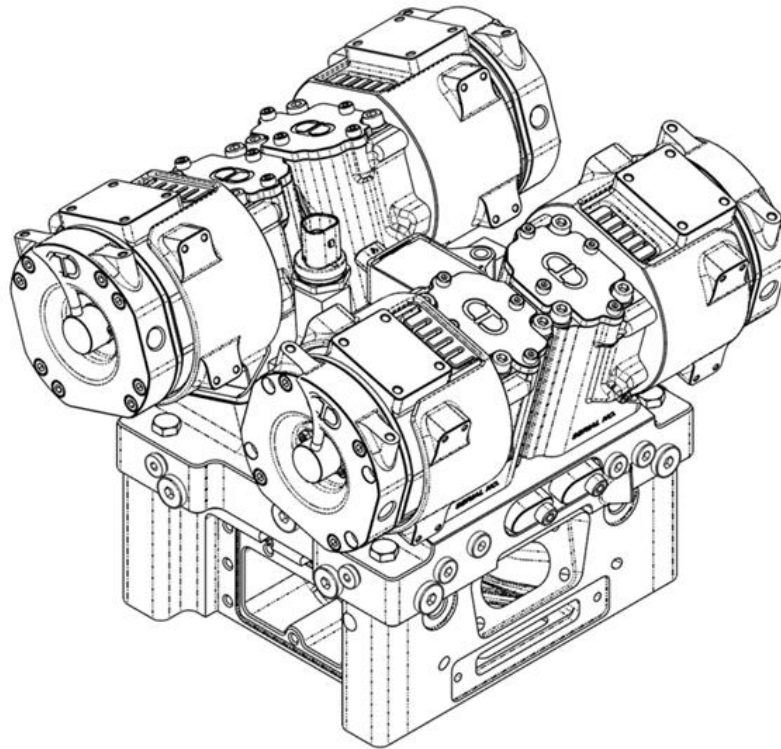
A View of the Single Cylinder Conversion kit as applied to a Ricardo Hydra at Brunel University
